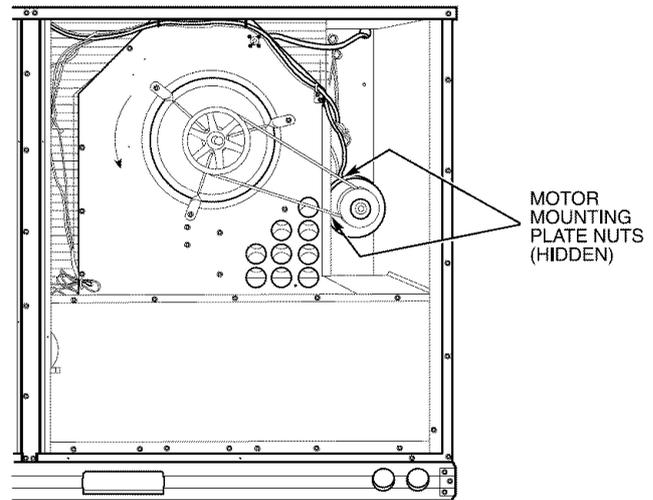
Typical Belt-Drive Motor Mounting for Sizes 012, 014
